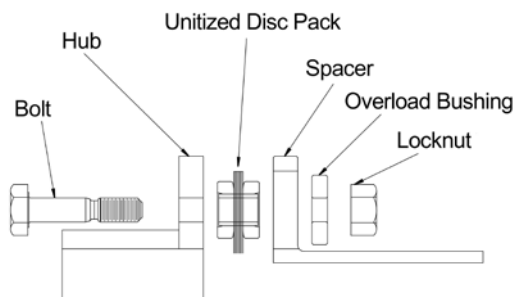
Disc Pack Bolt Configuration if No Adapter
